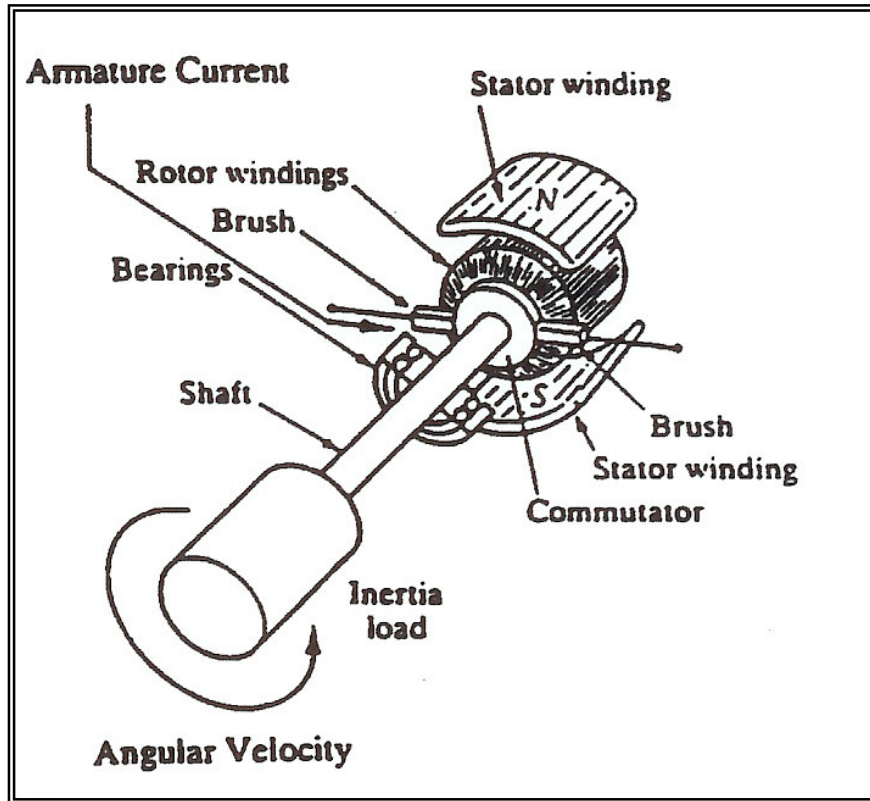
Schematic Drawing of a Brushed DC Motor
